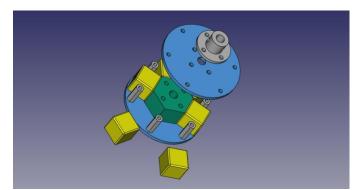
The rotor is comprised of six rare-earth magnets and steel hub sandwiched between two end plates. Flanges couple the rotor assembly the rotor shaft.
